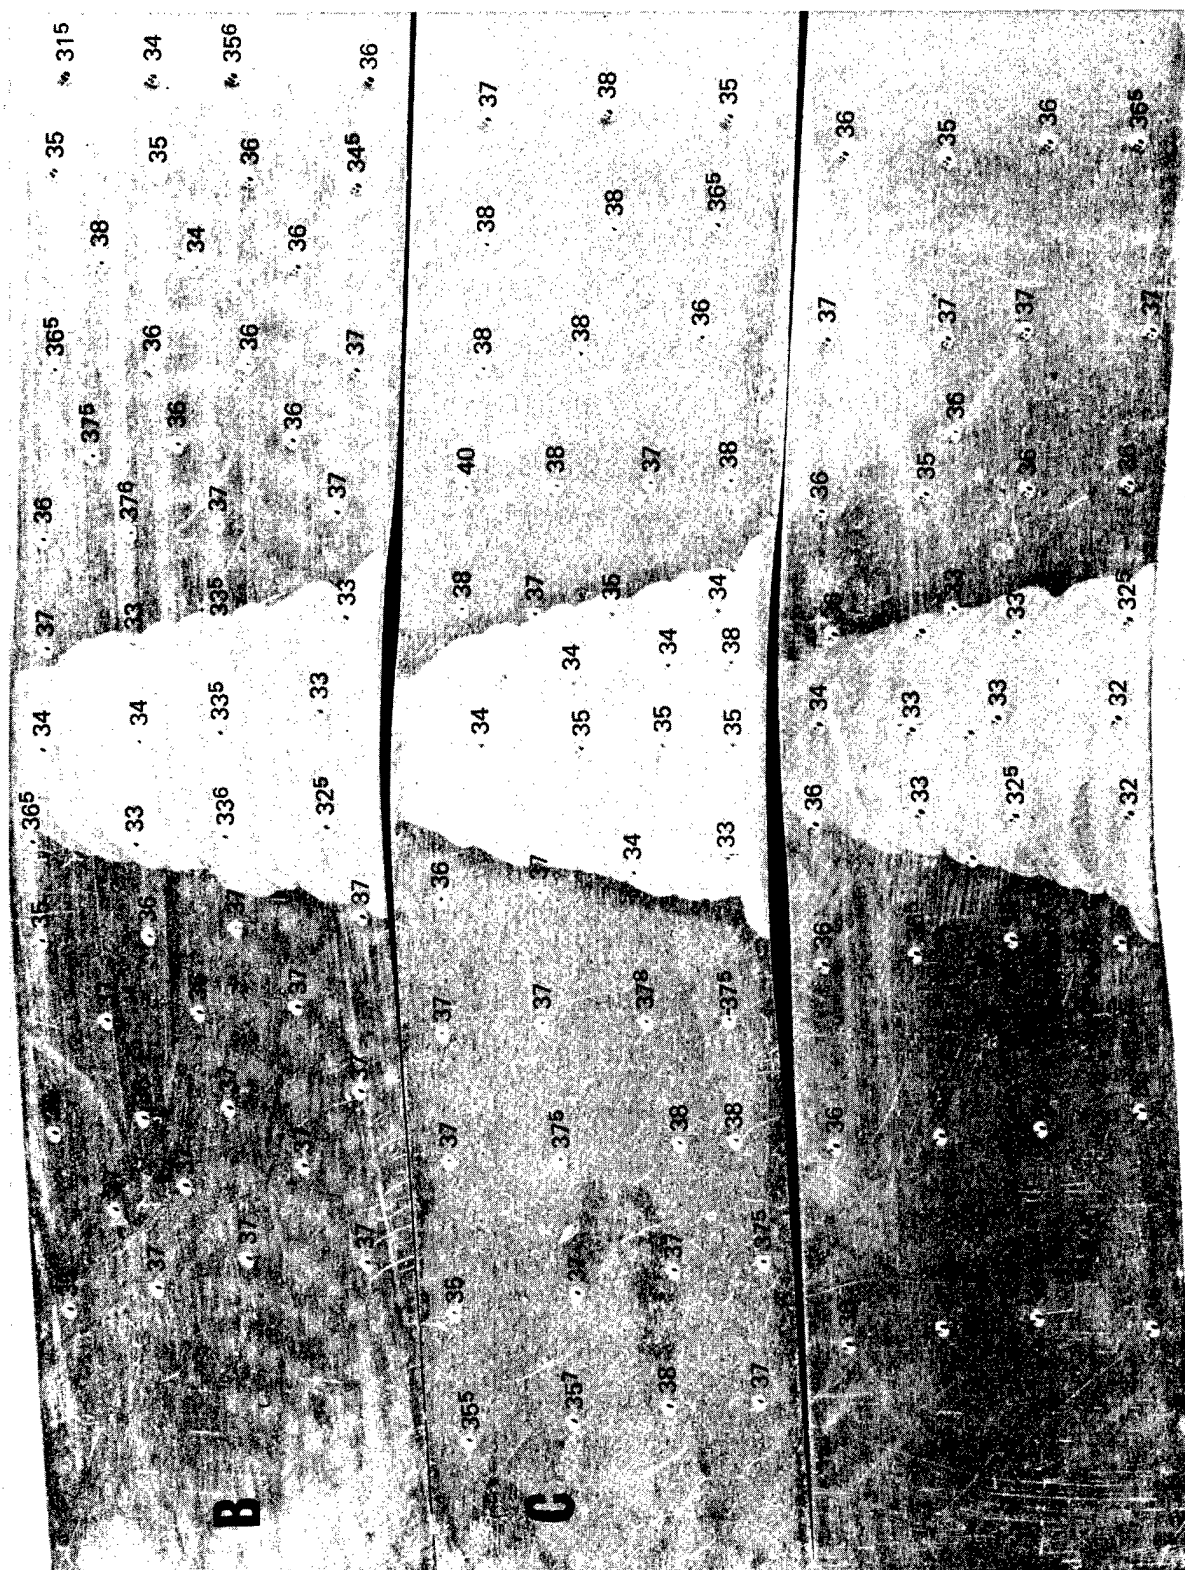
Sections of weldments of the 12Ni — 5Cr — 3Mo maraging steel made using 12Ni — 3Cr — 3Mo filler metal. After welding, sections were annealed at 815°C, air cooled, and aged at 480°C for 3 hours. Numbers at indentations are Rockwell C hardness values. (Neg. P67-8-33A)
